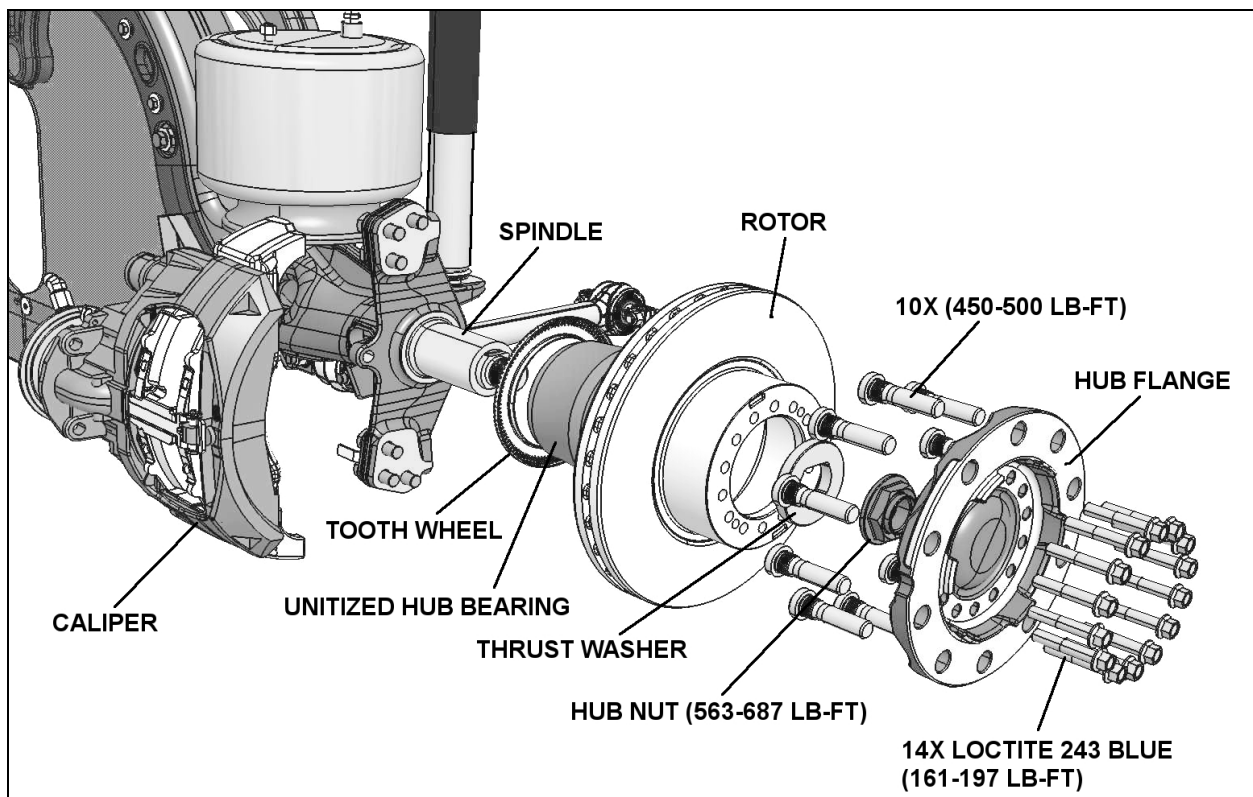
FRONT & TAG AXLE HUB AND ROTOR ASSEMBLY
